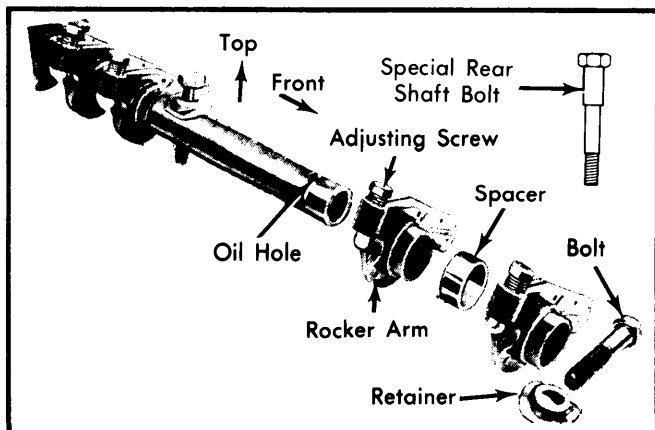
Partially Disassembled View of Rocker Arm Shaft Assembly
